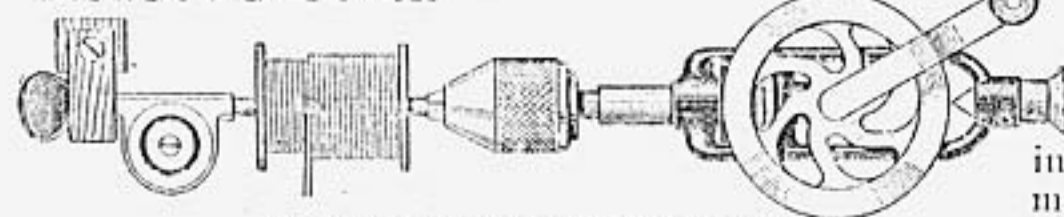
WINDING MANDREL ON HAND DRILL, BOTH DRILL AND COUNTER CLAMPED TO BENCH
